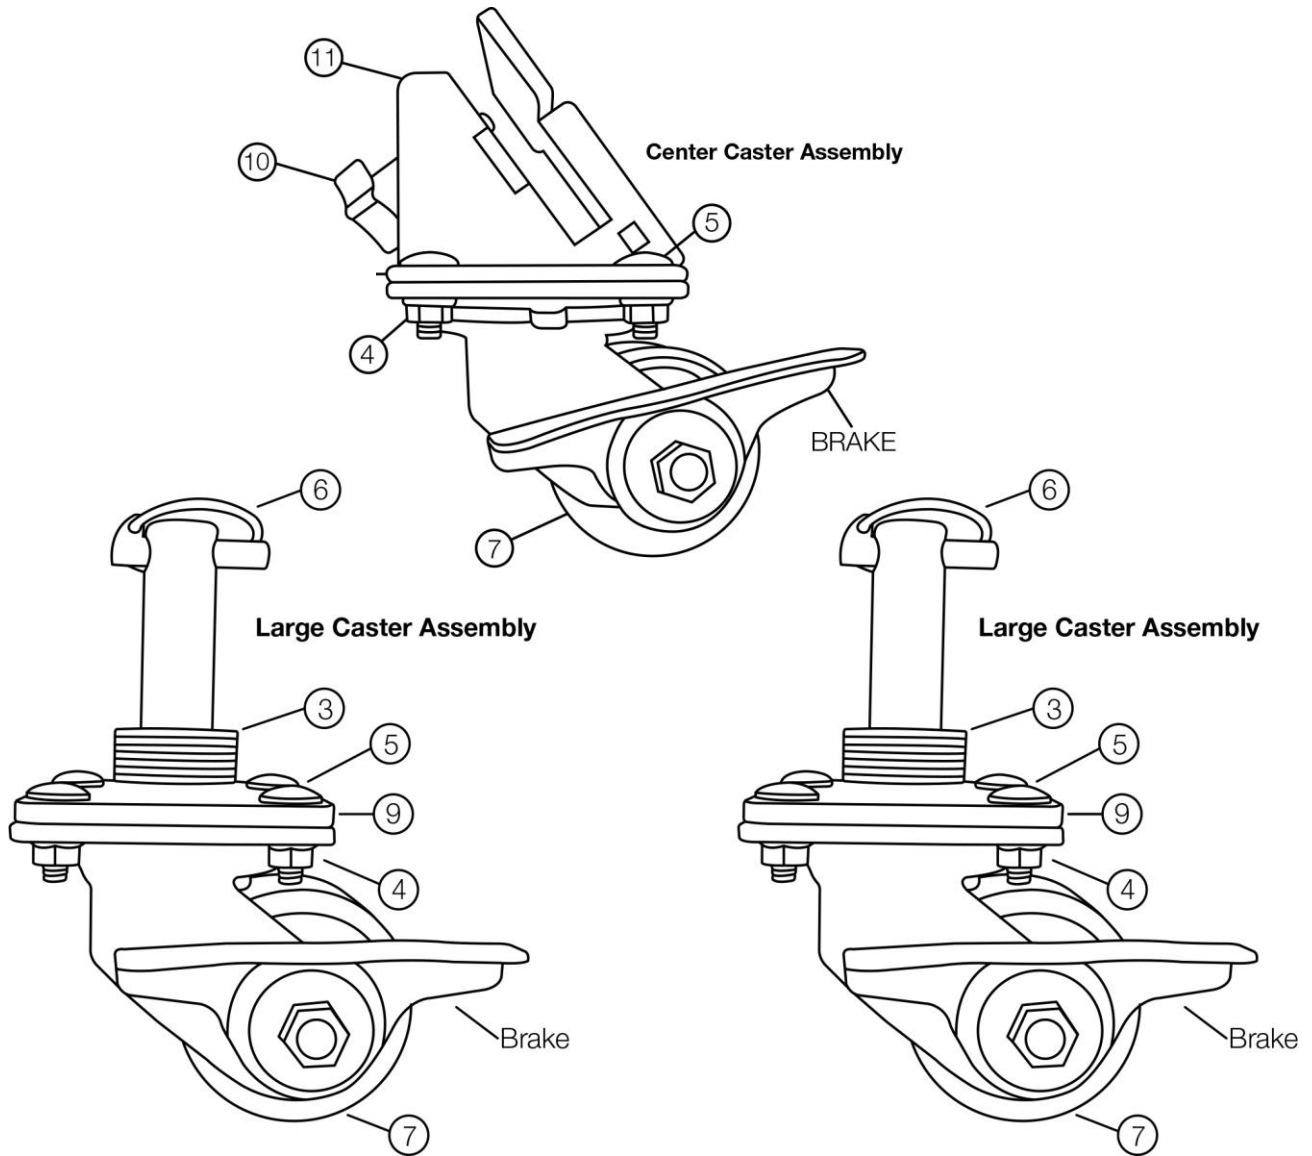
Caster Kit, UTV V-Blade Casters Shown Installed on a UTV Power V XT Blade
